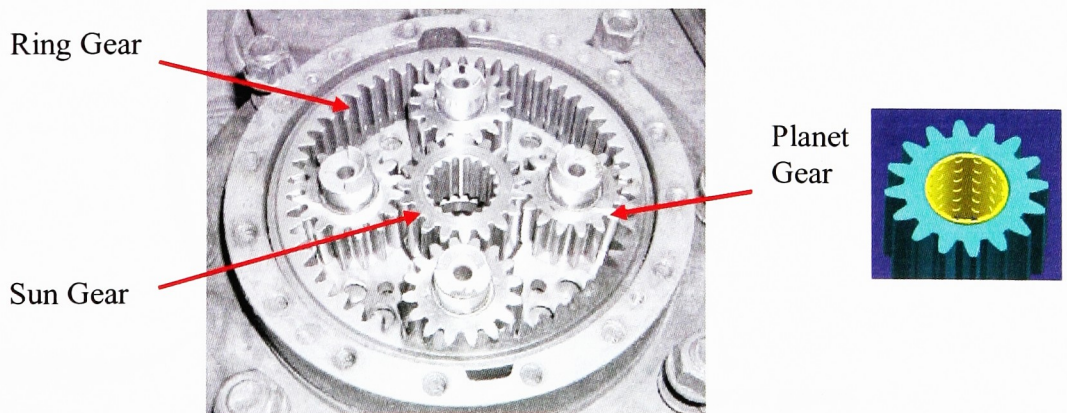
LAV Planetary Assembly (left), Planet Gear and Bushing (right)
